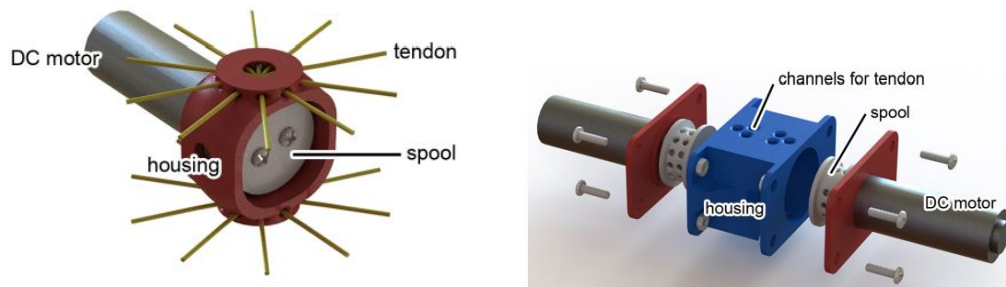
An internal winch should include a geared DC motor, a spool attached to the shaft of the motor, and a housing that collects all the cables.
